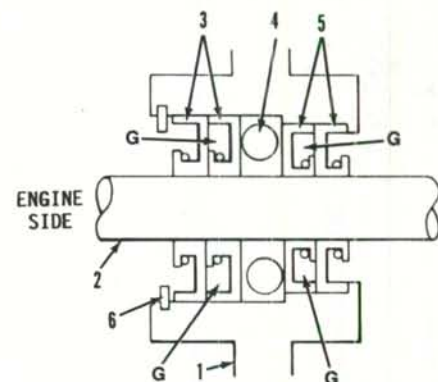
Cross-sectional view of bearing carrier assembly used on JS650SX models. Fill area (G) between inner and outer seals with a suitable high temperature grease.
